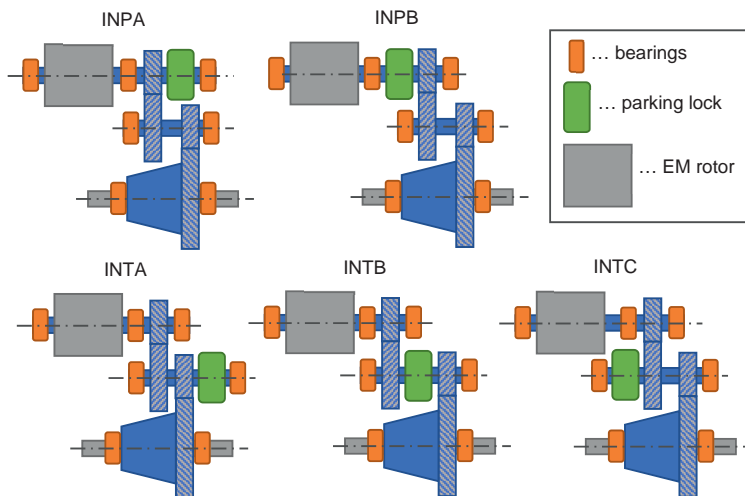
Mounting positions of the parking lock inside an e-drive with a single-speed, two-stage helical gearbox with offset output shaft
